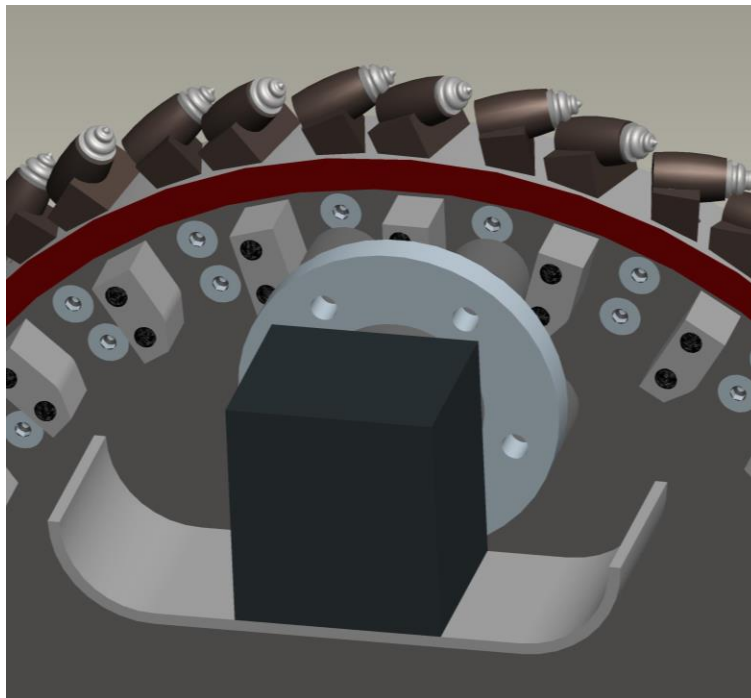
Skid plate (ski) mounted on a mock hydraulic motor.
